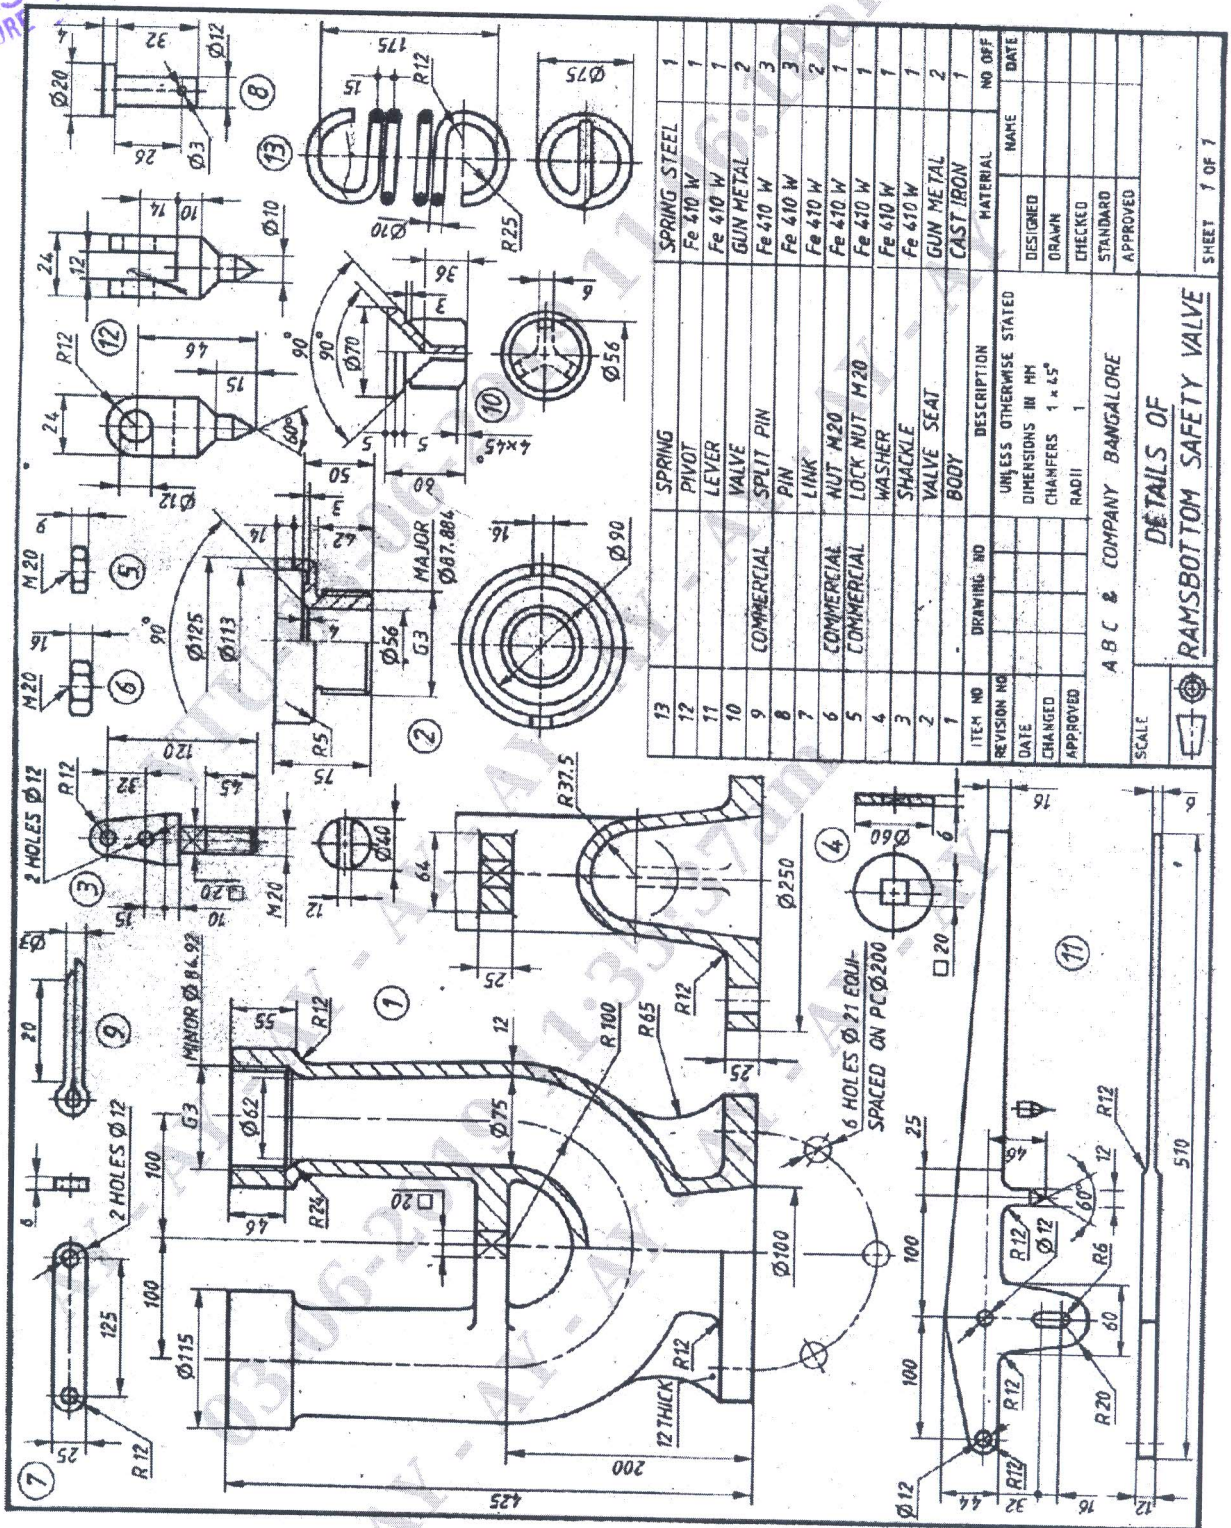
Part drawing of a "RAMS BOTTOM SAFETY VALVE"
